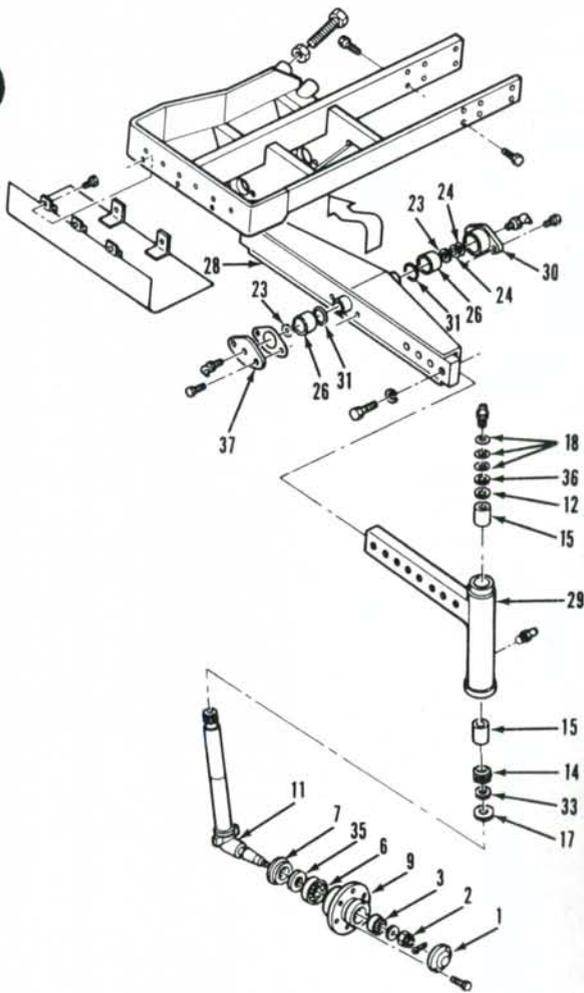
Exploded view of adjustable front axle assembly used on 1710 Offset tractors. Refer to Fig. 3 for legend except for the following:
